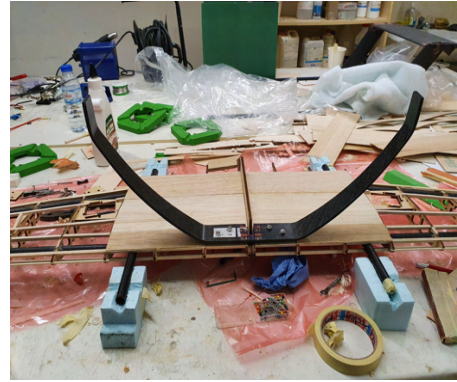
Front Landing Gear mounted in F-01 UAV.
